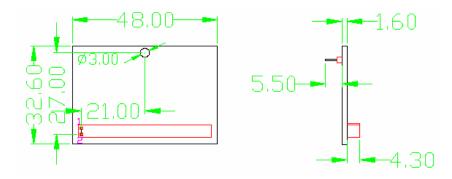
Mechanical Dimensions of iDiskOnChip, 44-Pin Horizontal Version
